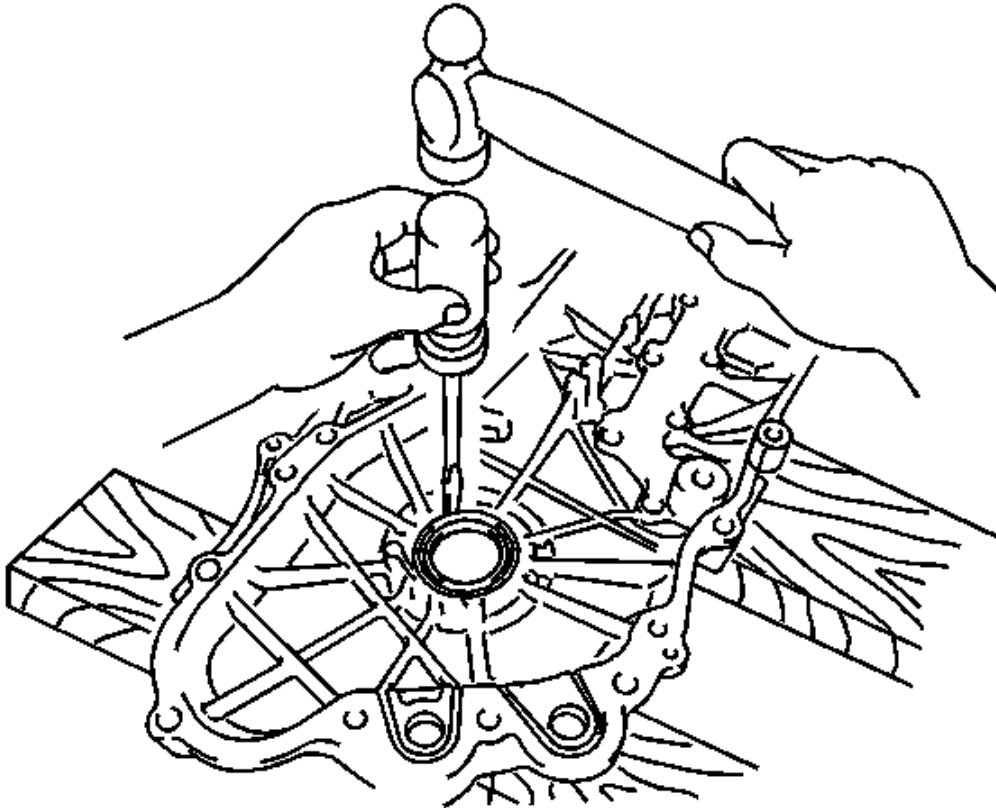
Illustrating Removing Timing Chain Cover Oil Seal
